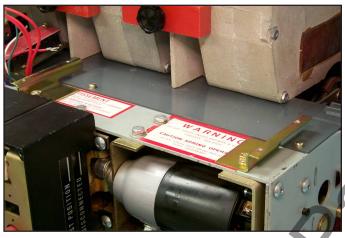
Aux. CT Module Mounting Brackets Installed on the Breaker.
